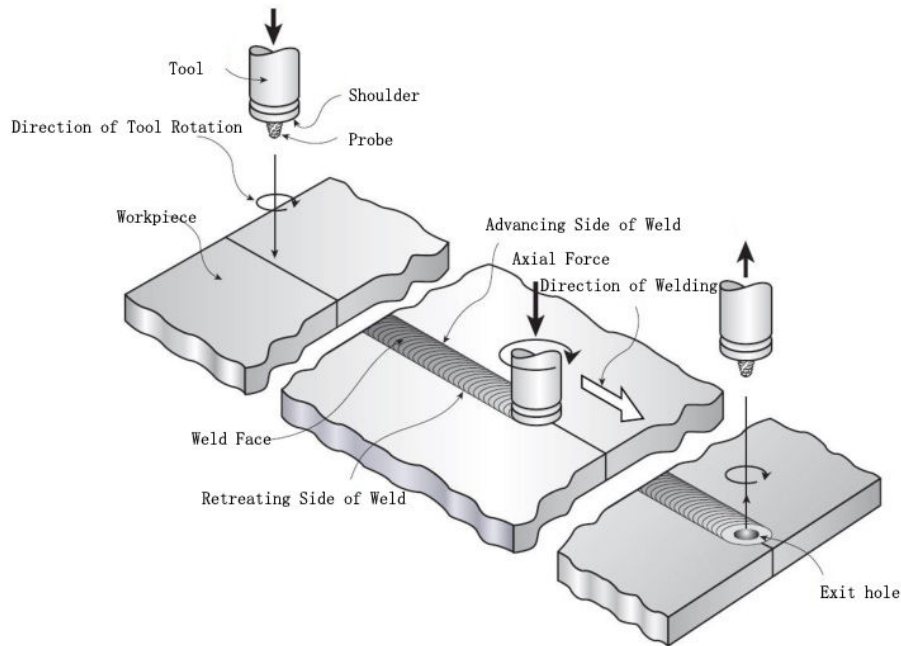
Schematic Diagram of Friction Stir Welding
